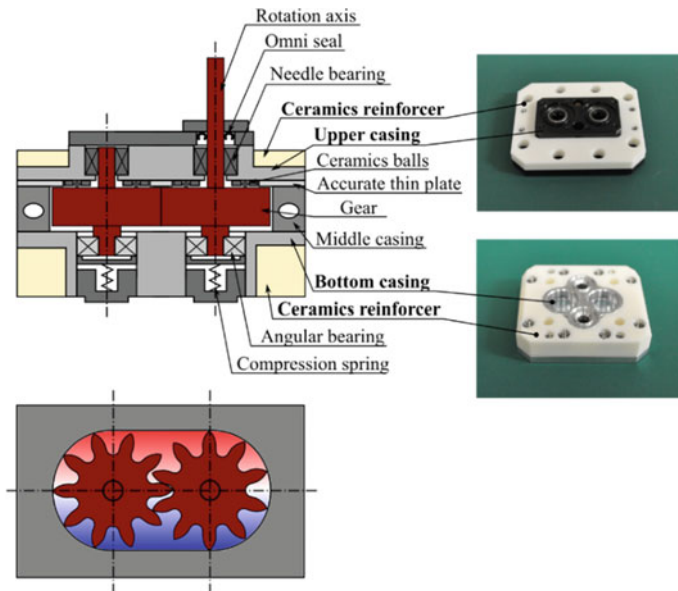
Involute gear pump with ceramics enhanced casings
